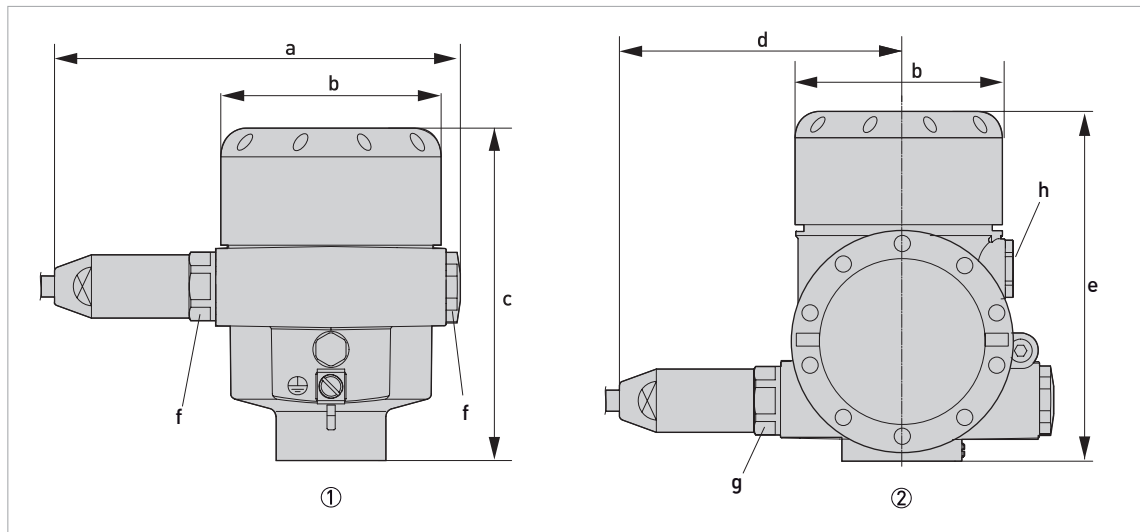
Aluminium housing in IP66 / IP68 (1 bar) version
